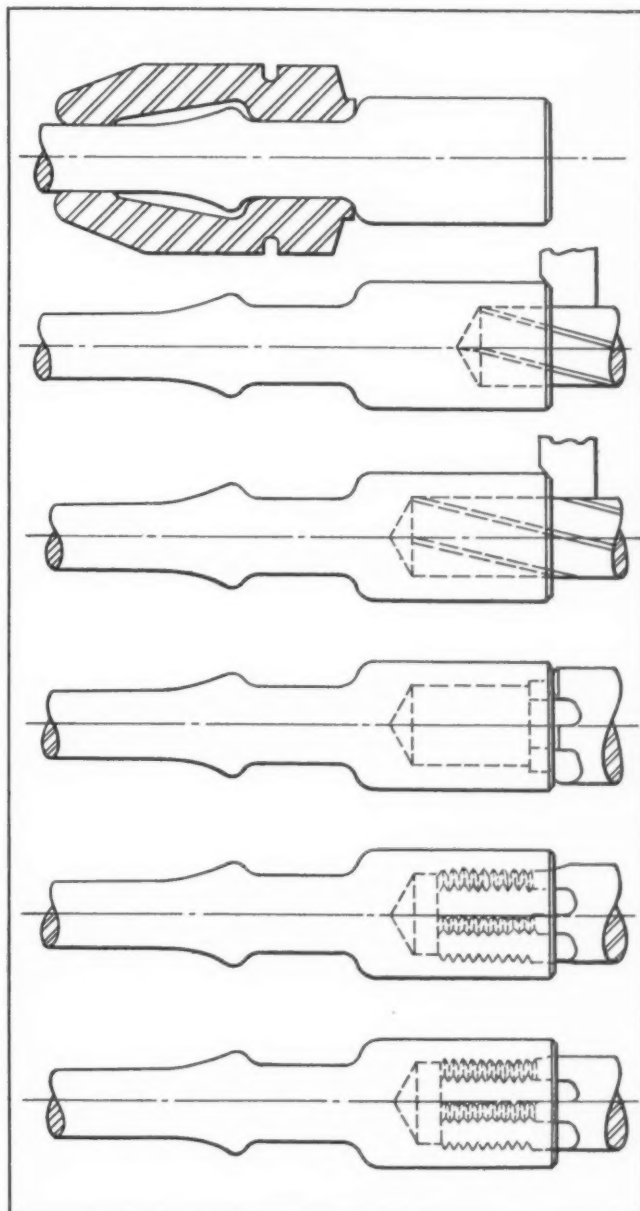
Sequence of Cuts Taken by a Gridley Bar Type Automatic in Machining the Socket End of Sucker Rods
